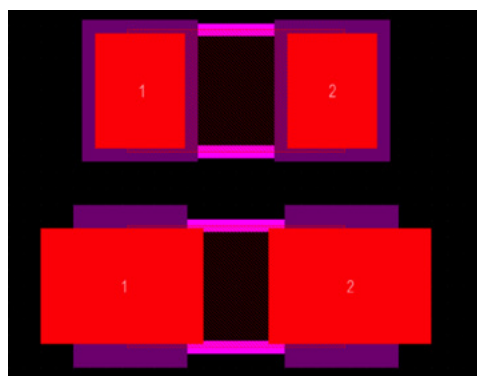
Adjusting the pad sizes and "mask" opening for coverlay. The top land pattern is for a nominal 0603 size chip component, whereas the bottom is modified for coverlay anchoring
